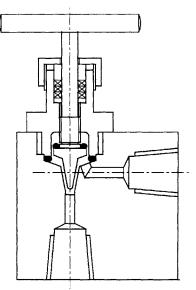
Forged needle valve for meter applications Courtesy of H H Valves Ltd
